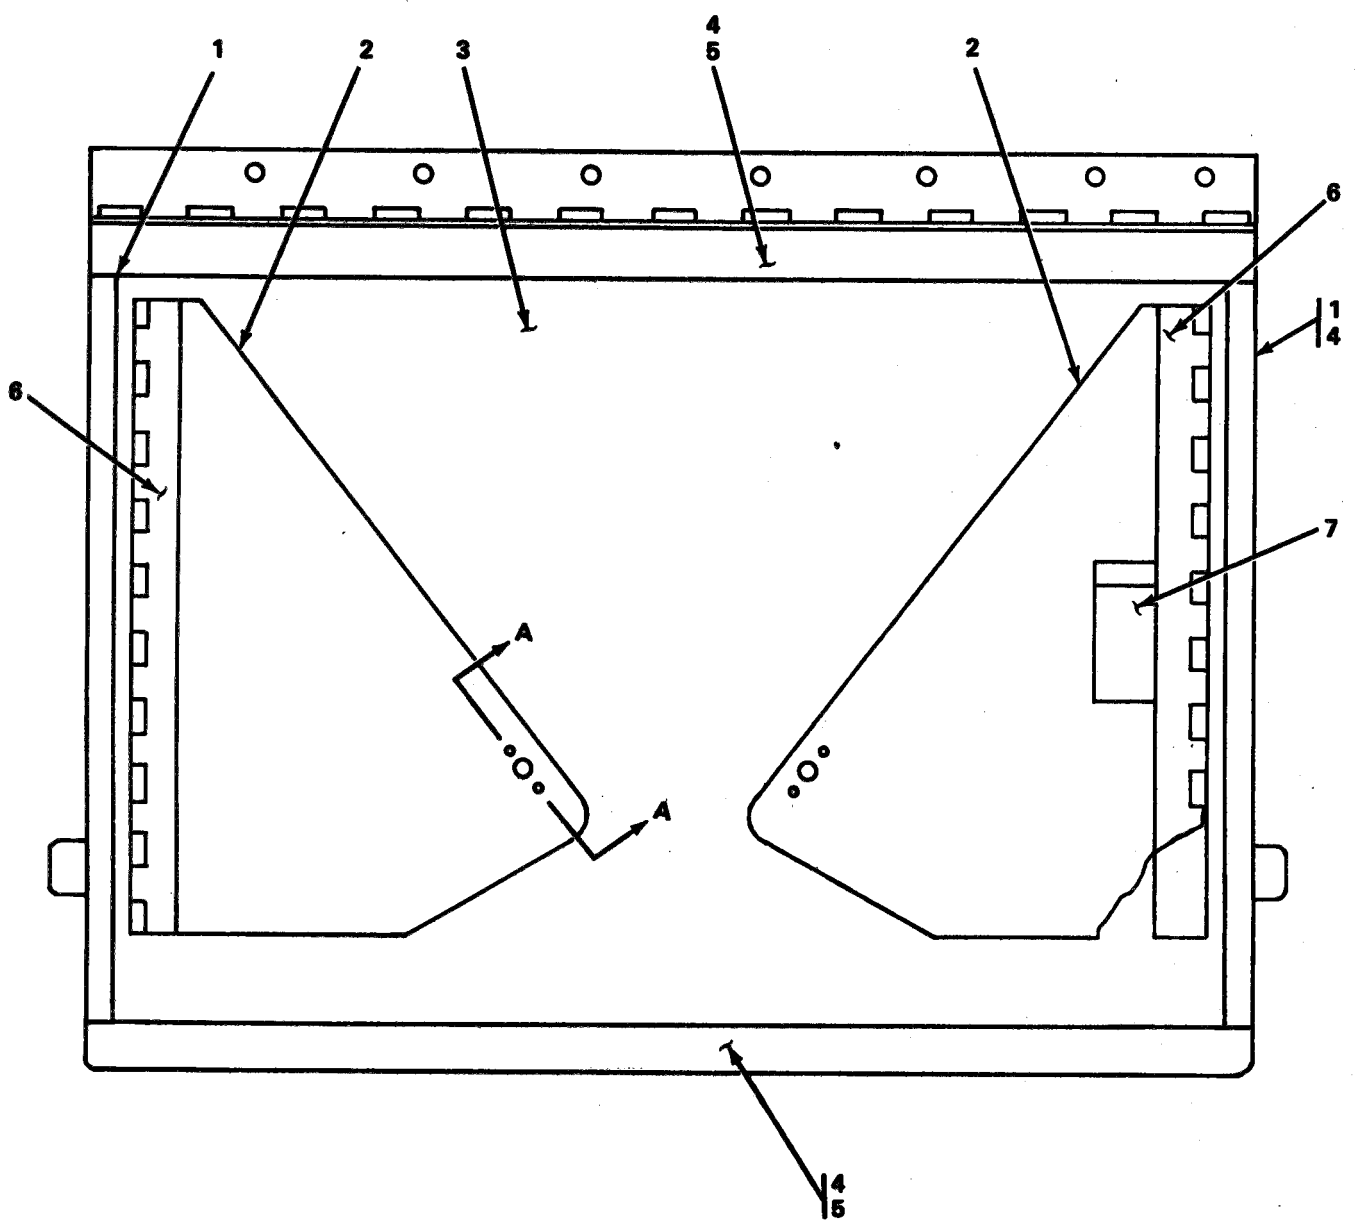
Power Entrance Box Cover Assembly (Sheet 1 of 4)
